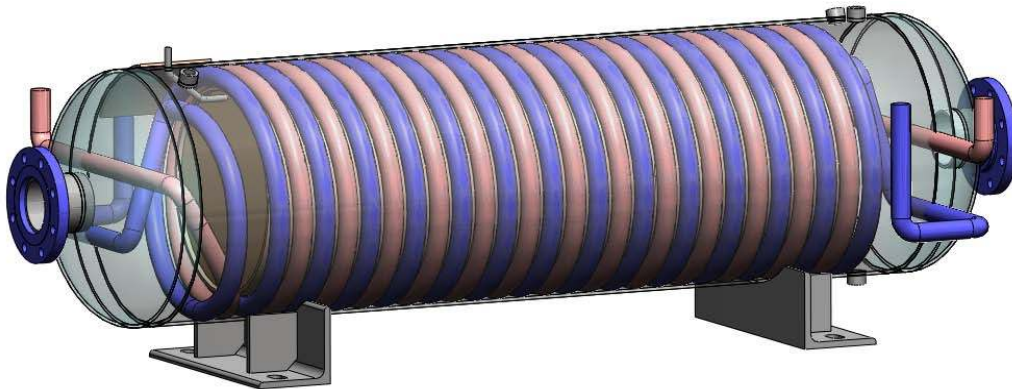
Engineering drawing of the compressor loop showing the ~50 kW gas chiller with the outer water housing jacket removed to show the S-CO₂ spiral cooling lines.
